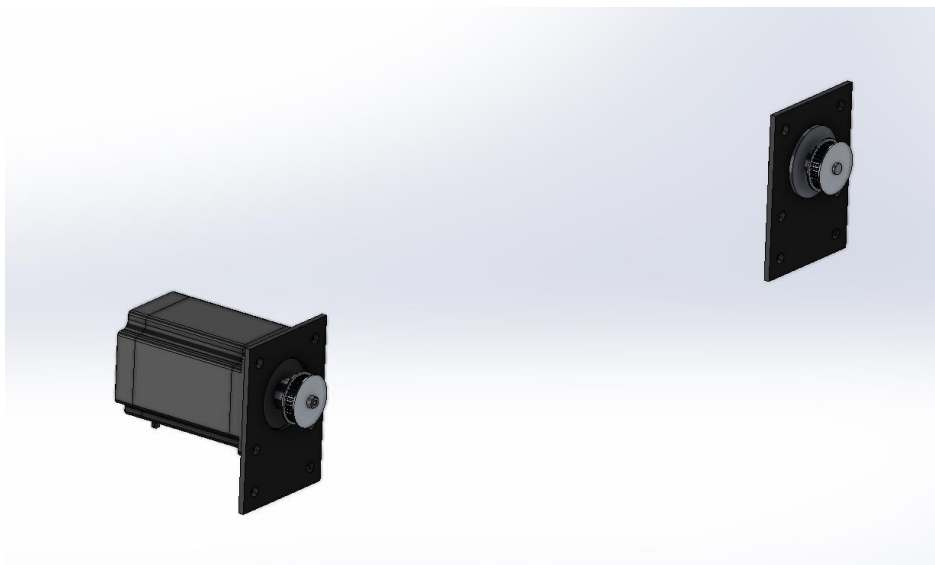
Mounting plates connected to the stepper motors and the pulleys.
